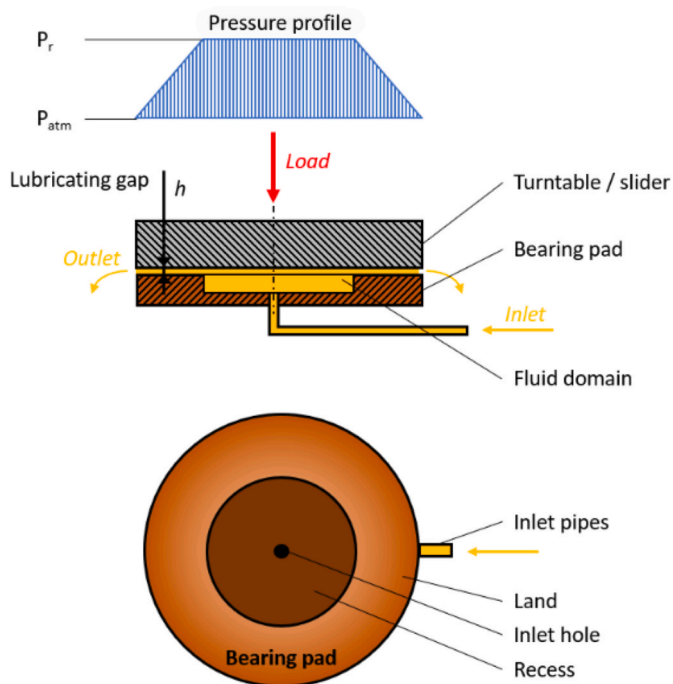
Longitudinal cross section of the bearing (contact) with fluid pressure profile, and top view of the bearing pad.
